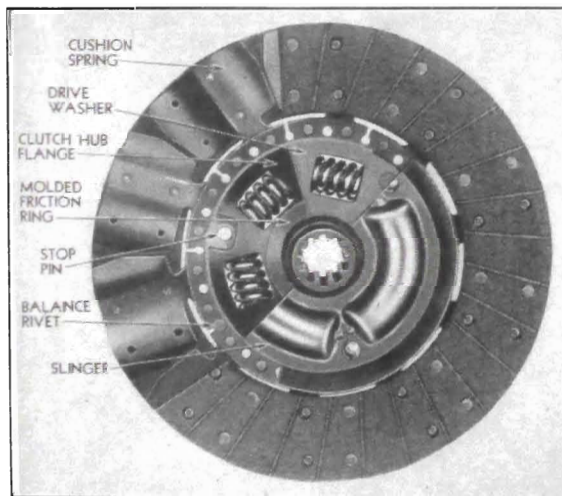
Driven Plate—Series 60-70-90—Transmission Side
